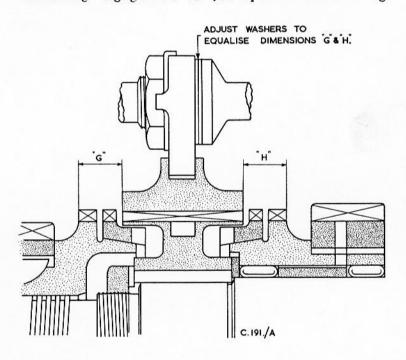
Adjusting 3rd and 4th speed sliding hub engagement.
